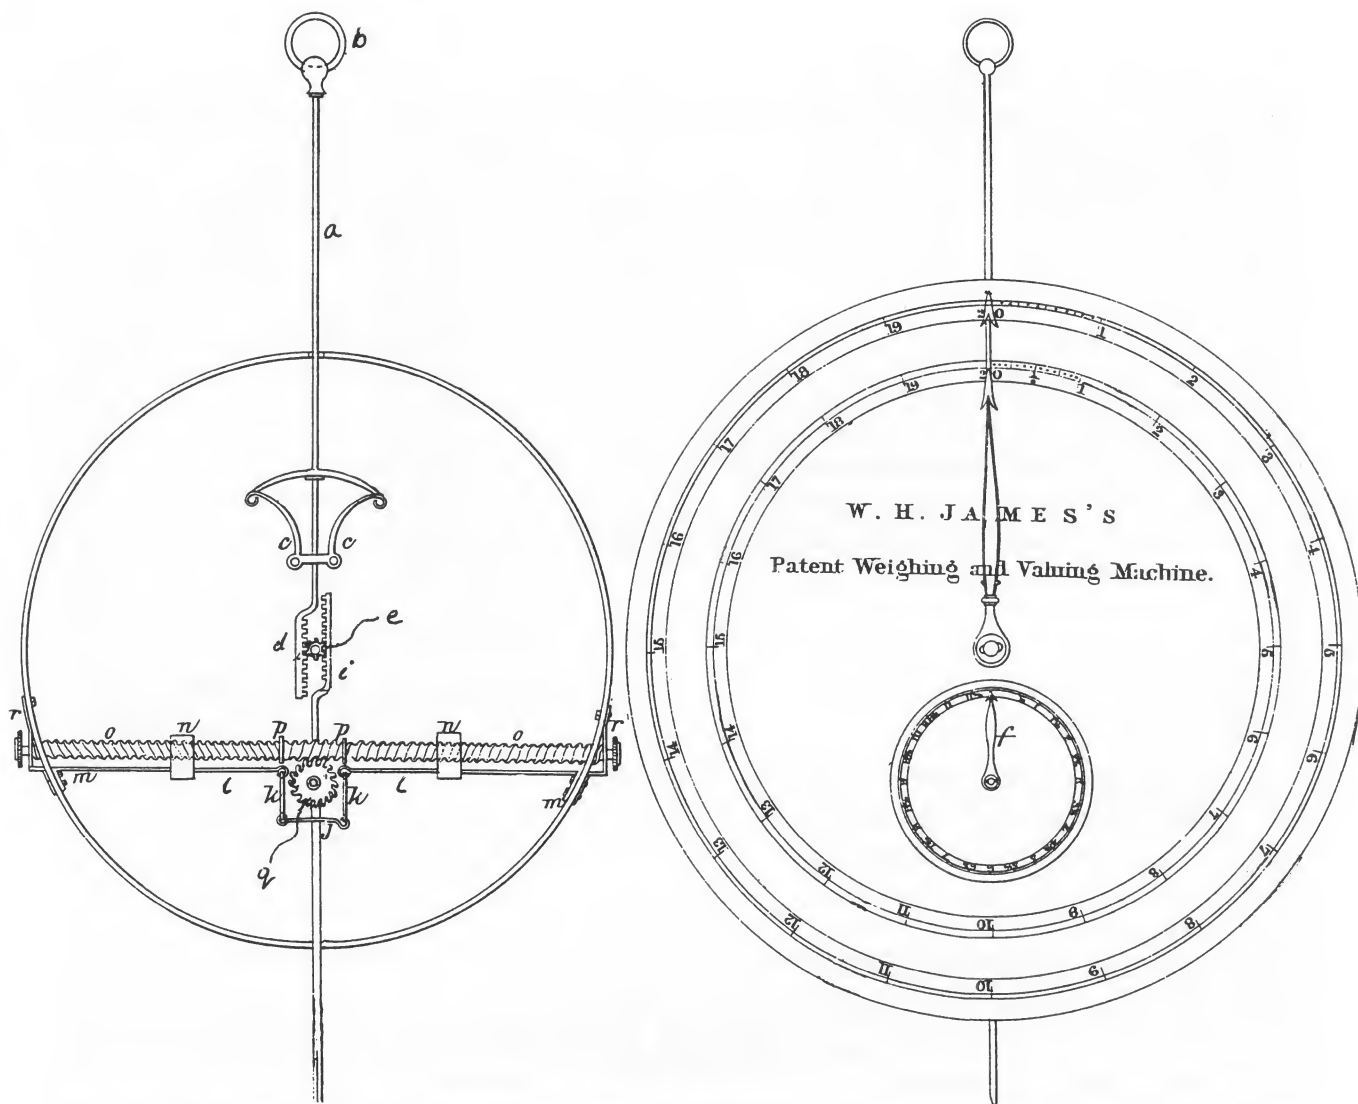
and 12. ^^ James' most ambitious new idea, comprising a C-spring balance and an adjustable price-indicating mechanism operated with flexure springs in the same case.
